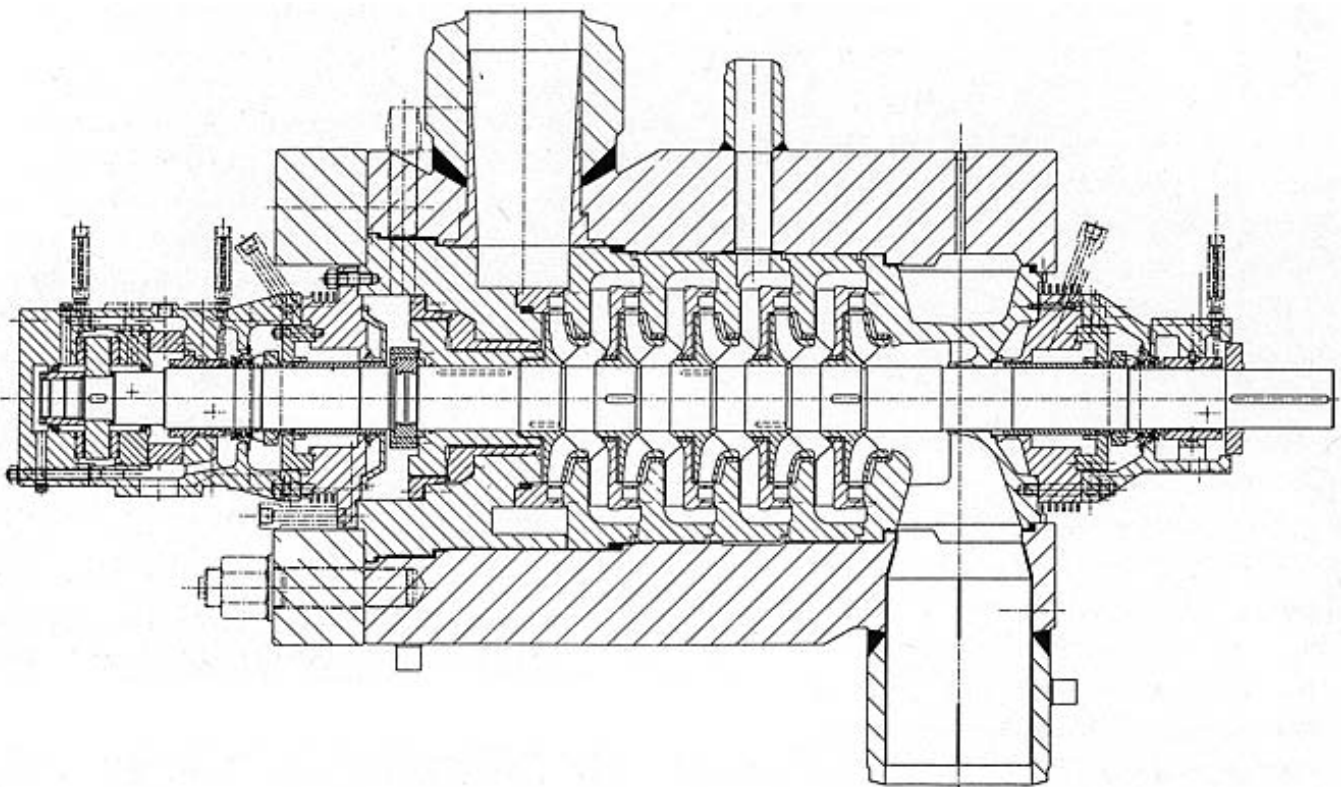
Boiler feed pump in barrel insert design with tapping stage
